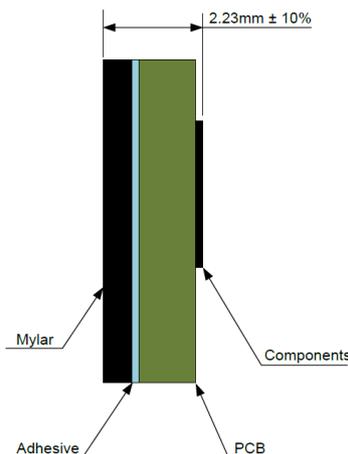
Stack-Up (B) - Thickness: PCB + 3M double sided adhesive + Mylar overlay
